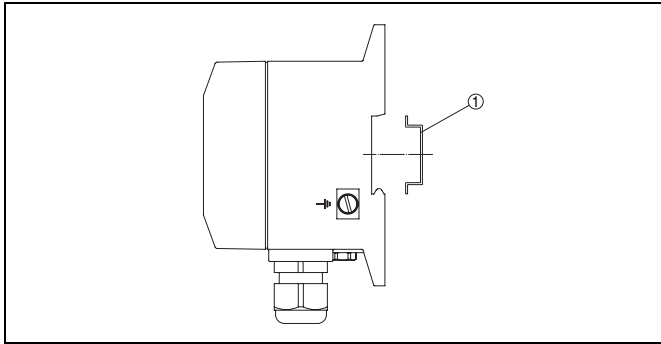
VEGADIS 11 and VEGADIS 12 carrier rail mounting
